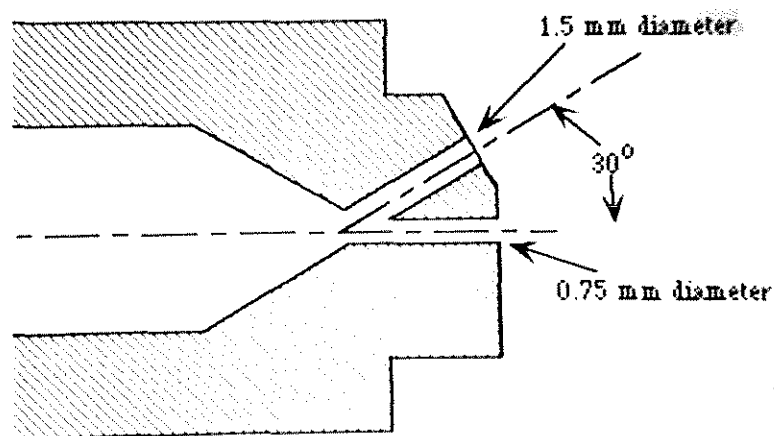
Nozzle geometry for a high pressure waterjet drilling nozzle assembly
